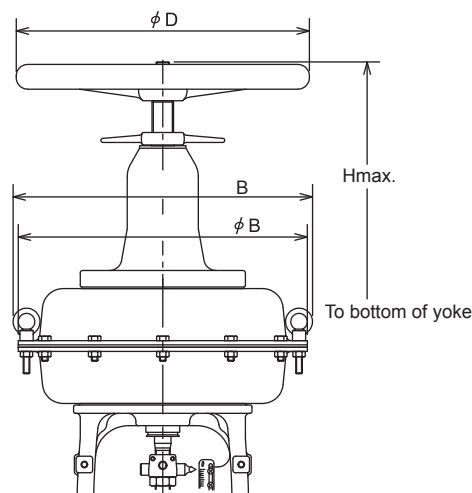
Dimensions of Multismotor with top-mounted hand wheel
